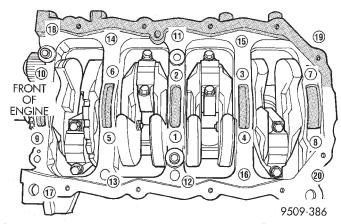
Main Bearing Caps/Bedplate Torque Sequence
